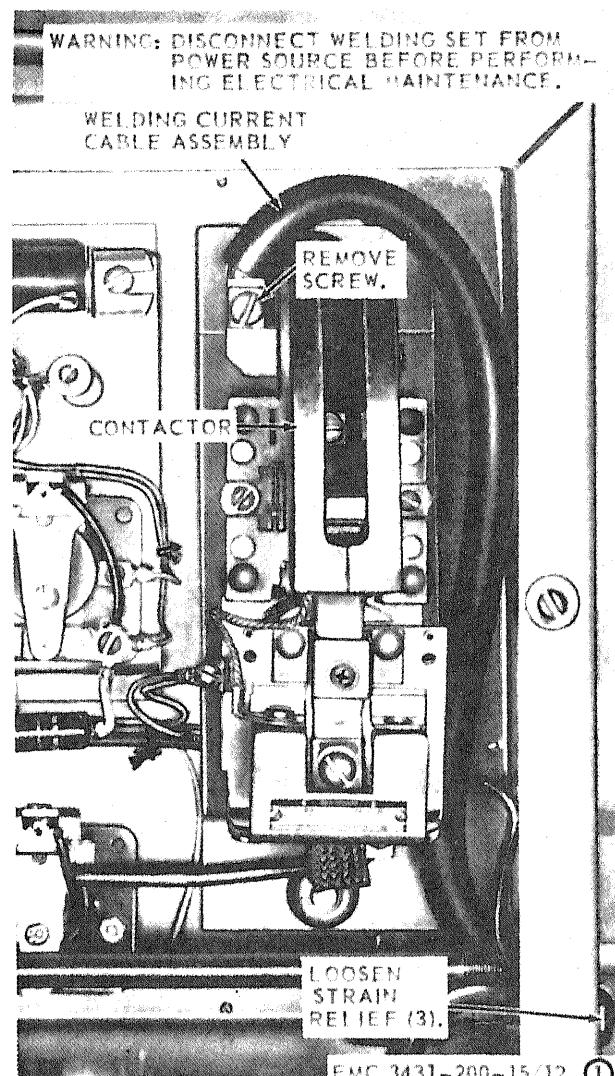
Cable assemblies, grip, strain reliefs, power switch, and terminal strip, removal and installation.
